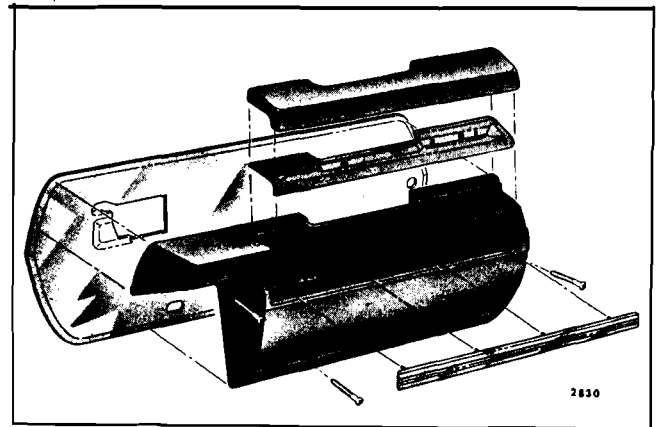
Applied Type Door Arm Rest - "B" Styles Shown
